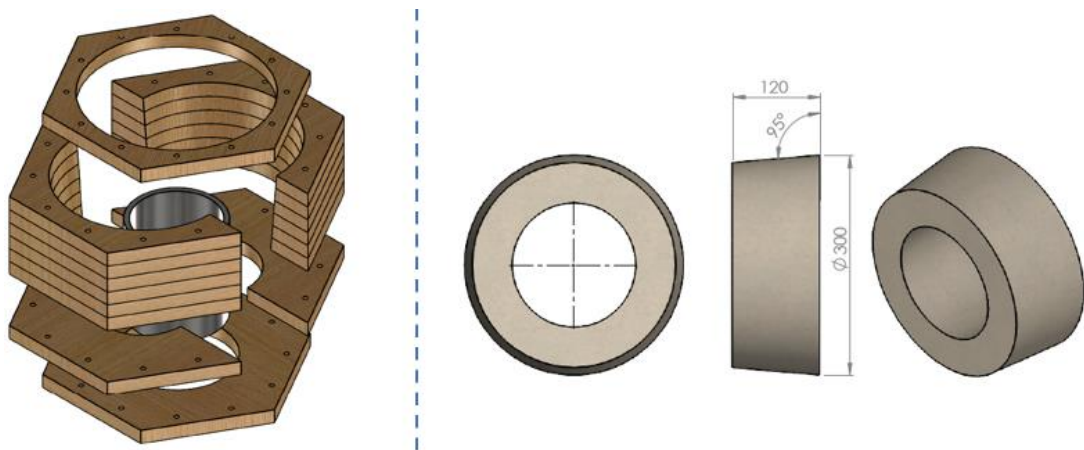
(Left) CAD of 7 piece cement mould designed to be made from wood and machined on a lathe. (Right) Maximum cement moulding size expected from the mould.
